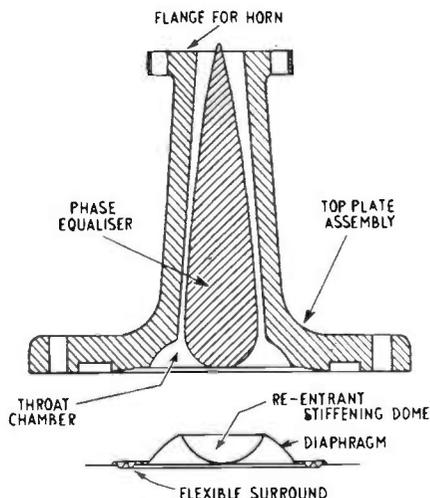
Section of H.F. loudspeaker diaphragm and throat assembly.
